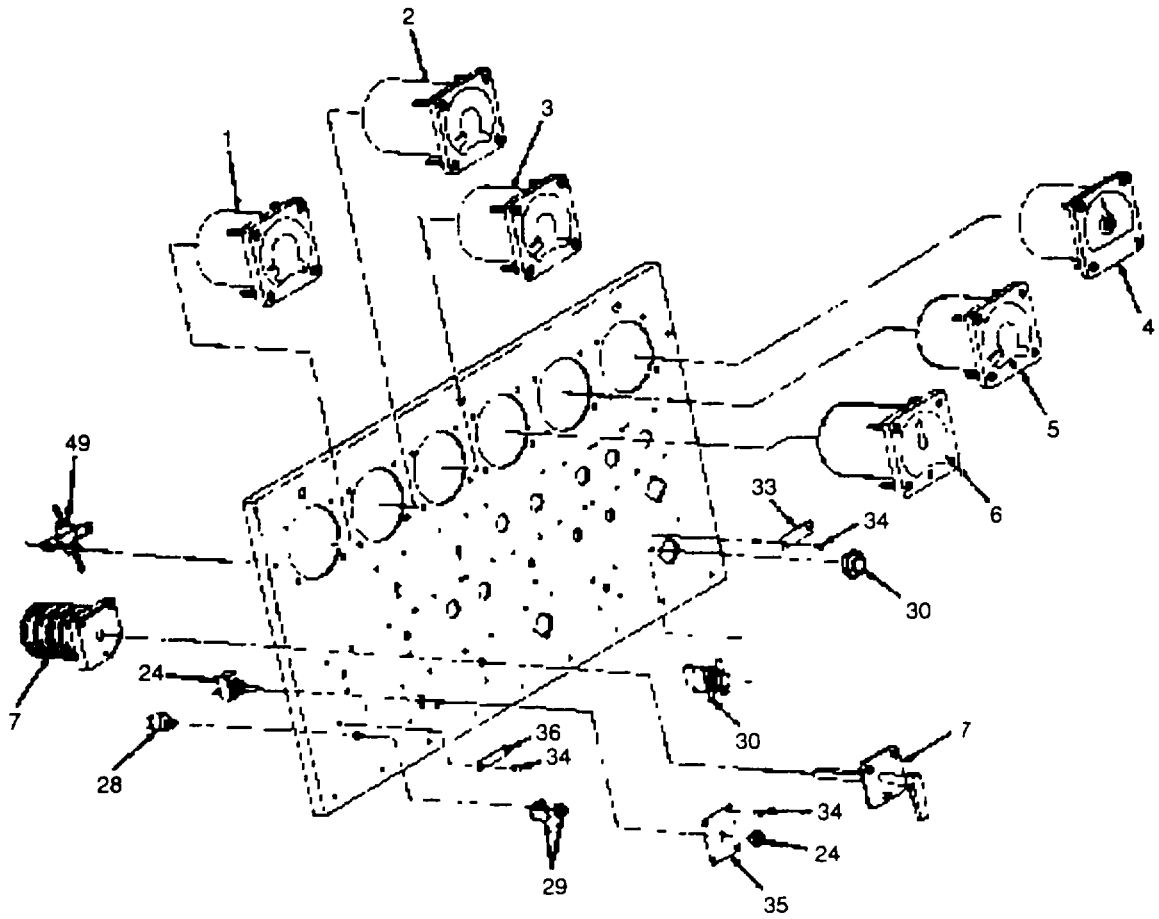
Remote Control Module, Door Assembly (Sheet 1 of 4)
